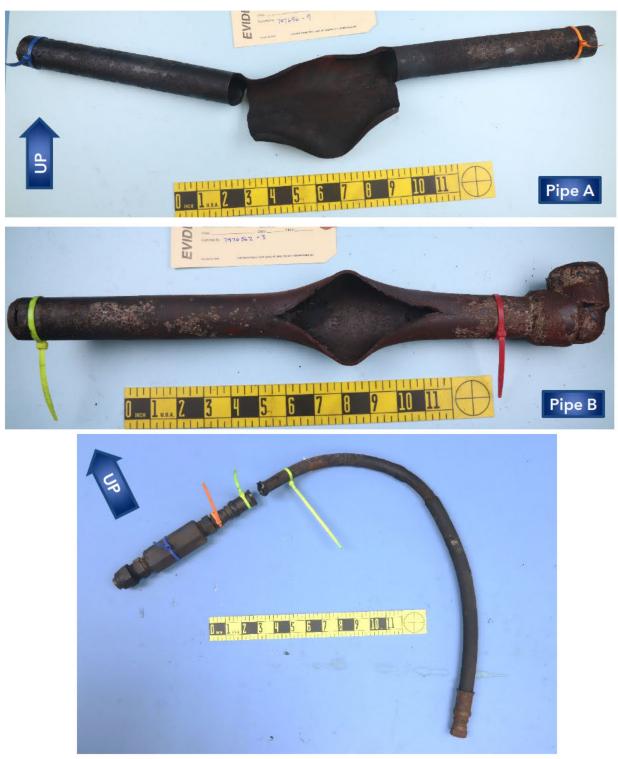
Overall views of the hydraulic pipe located at the outboard side of the port engine (upper image), upper side of the hydraulic pipe from the hydraulic pump space (middle image), and hydraulic relief valve hose and fittings (lower image).
